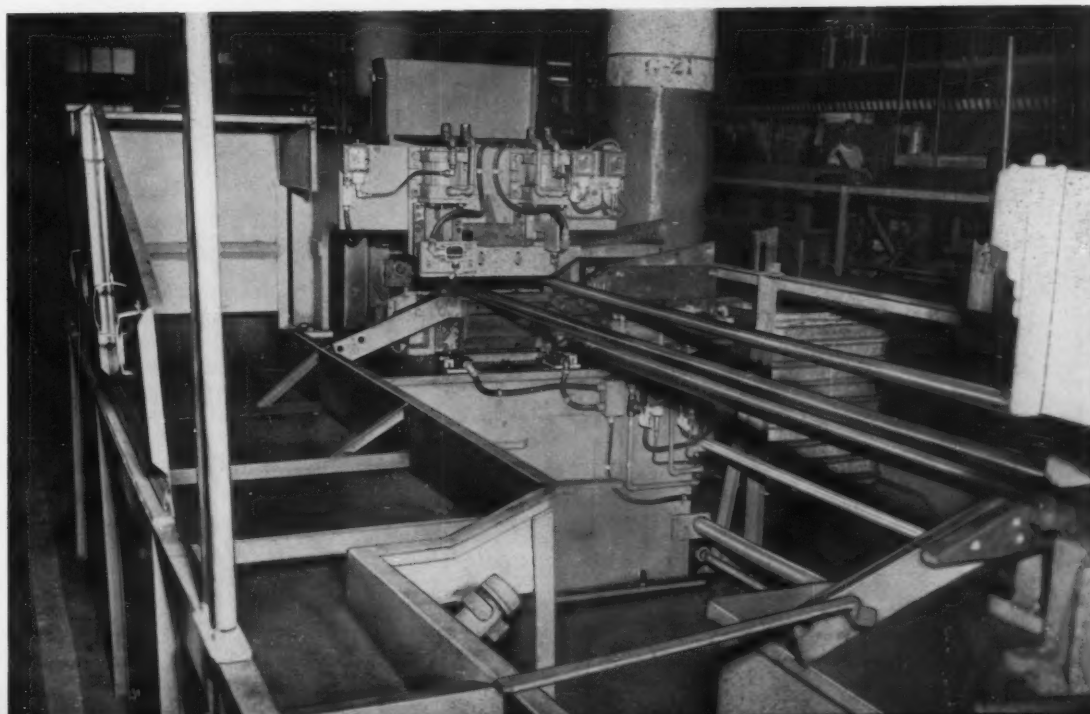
(Above) This mill cold-forms and welds continuous lengths of strip into tubing. Guard has been removed to show the forming operation.
